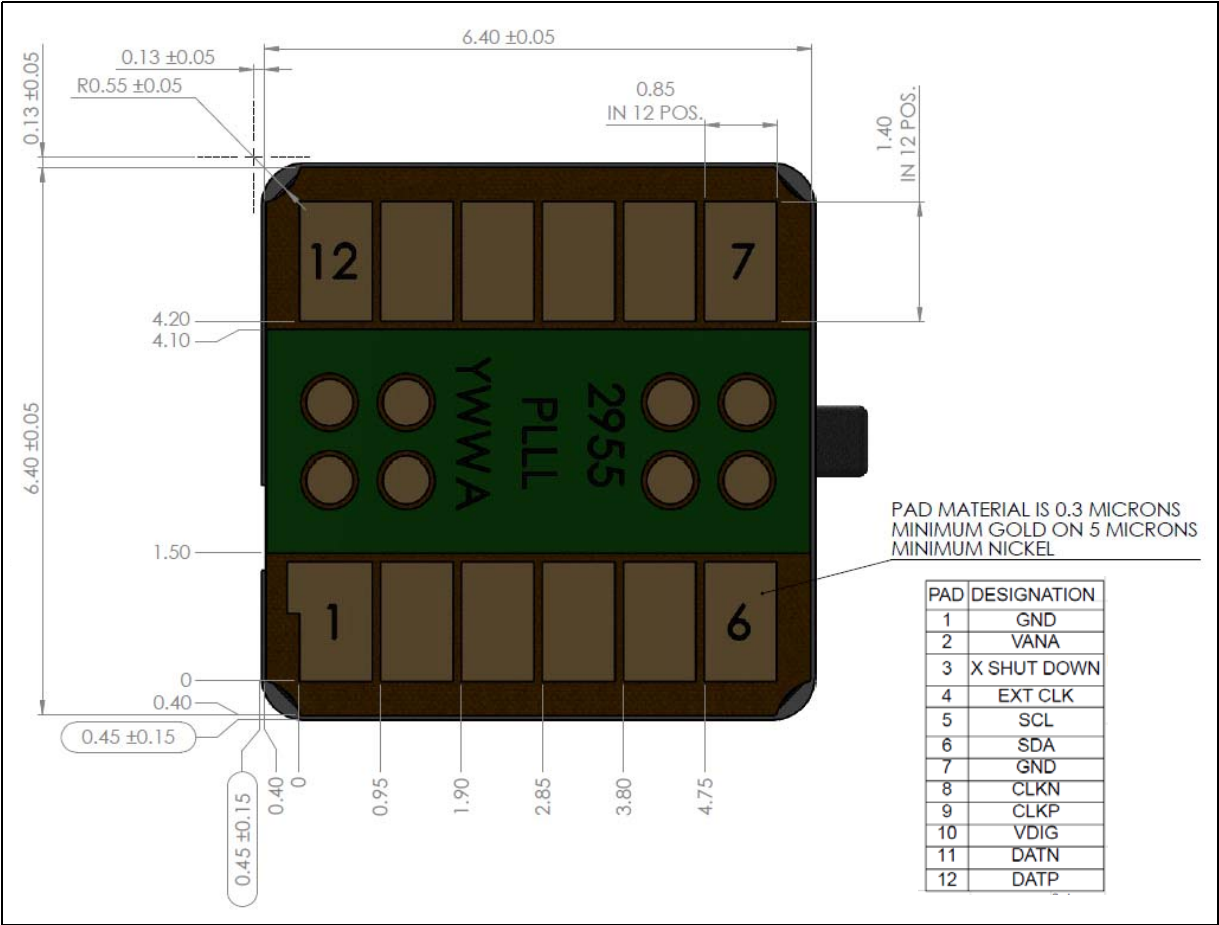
VS6955CA outline drawing - 3 of 3 - All dimensions in mm
